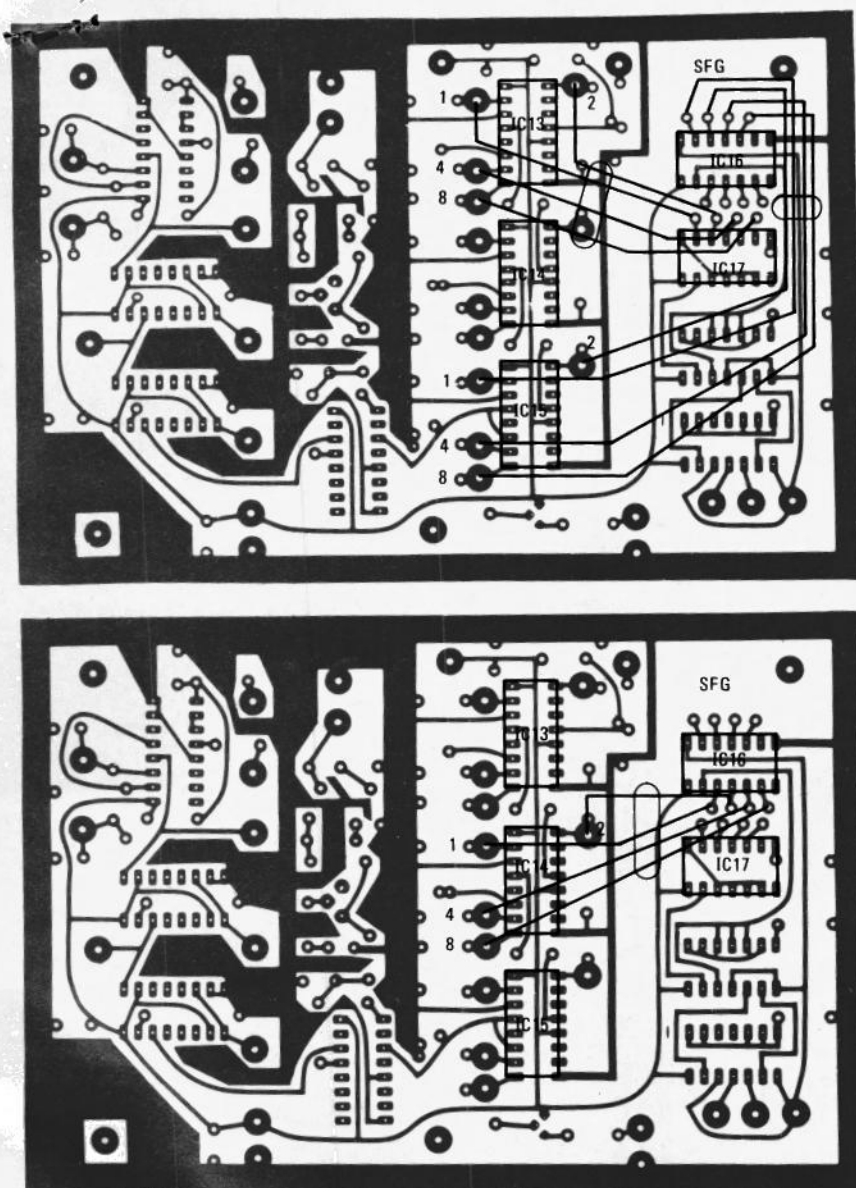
TWO DIAGRAMS showing placement of the jumpers on the foil side of the digital board. Flat, color-coded cable can be used for the jumpers.
